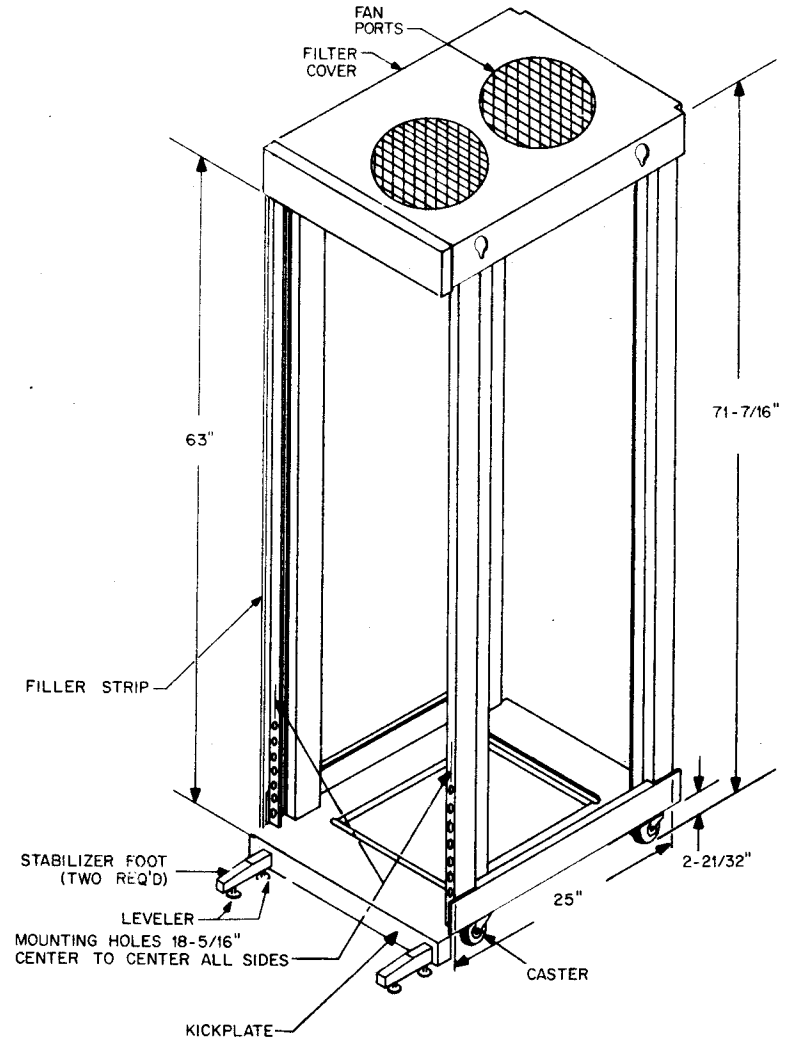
Typical H960-Series Cabinet Frame—Dimensions
